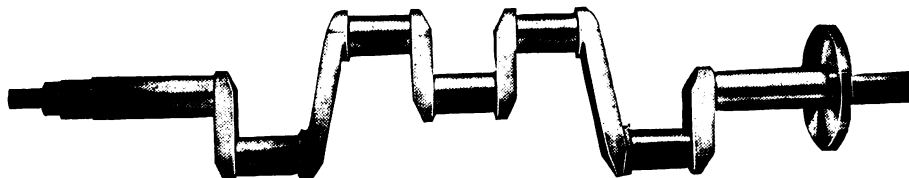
FOUR-CYLINDER CRANK SHAFT.
